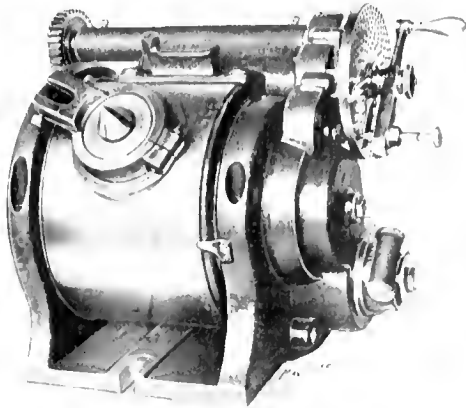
Head Arranged for Differential Gearing with Angle Adjustment.
